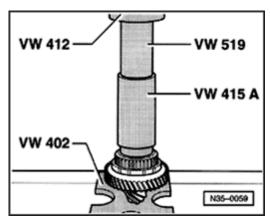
Pressing on synchronizer hub for 1st and 2nd gears
